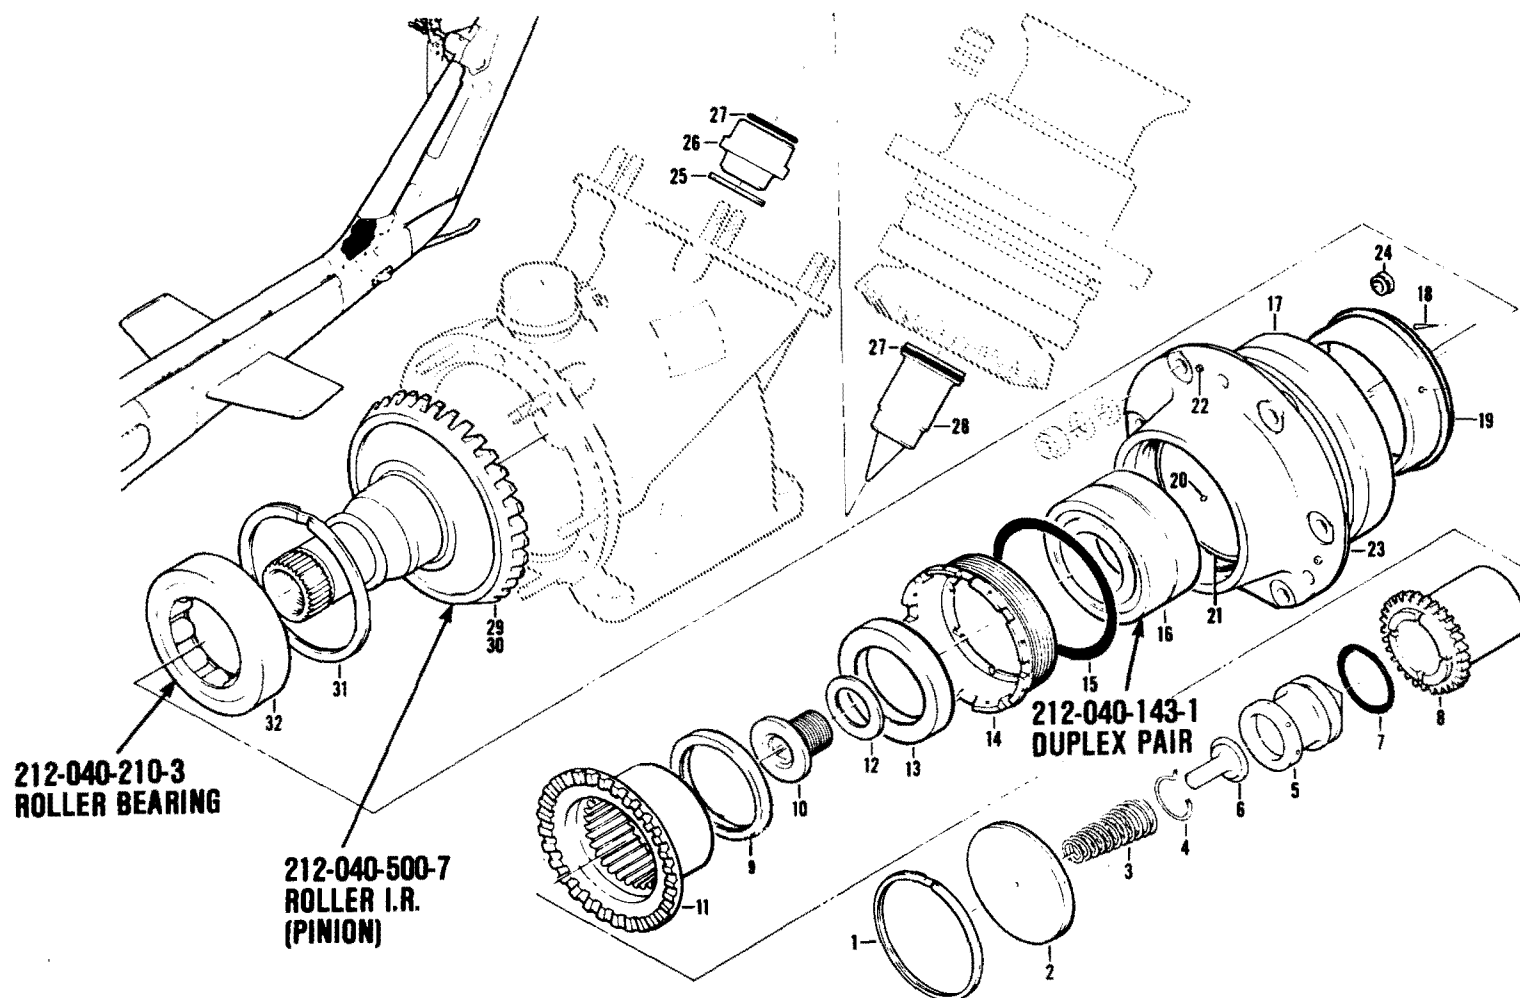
Quill Assembly, 42-Degree Gearbox, AH-1S
